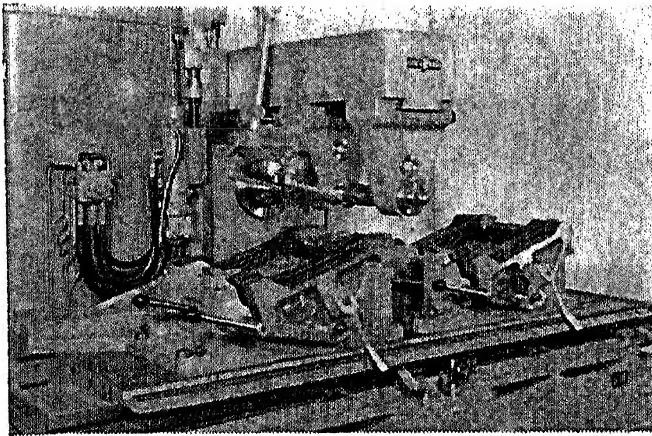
A No. 5-60 plain tracer controlled Hydromatic production type milling machine. (Courtesy Cincinnati Milling Machine Co.)
